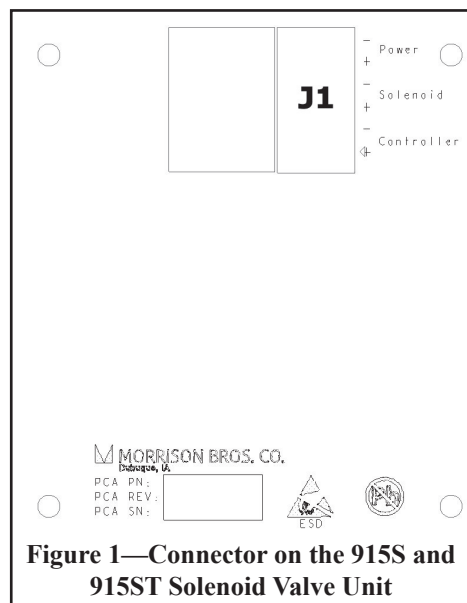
Connector on the 915S and 915ST Solenoid Valve Unit
